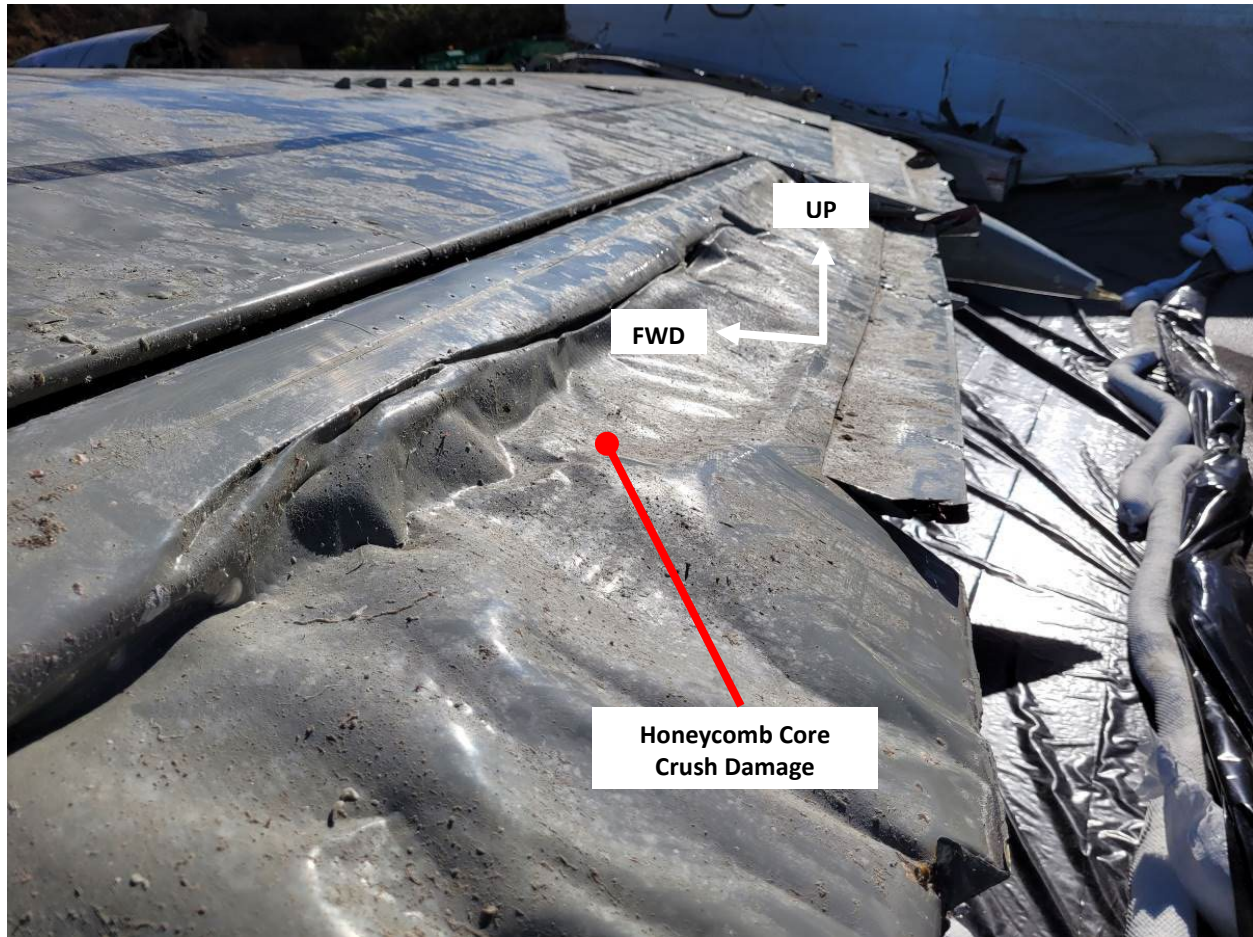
Left outboard aft flap honeycomb core crush damage (Boeing photo)
